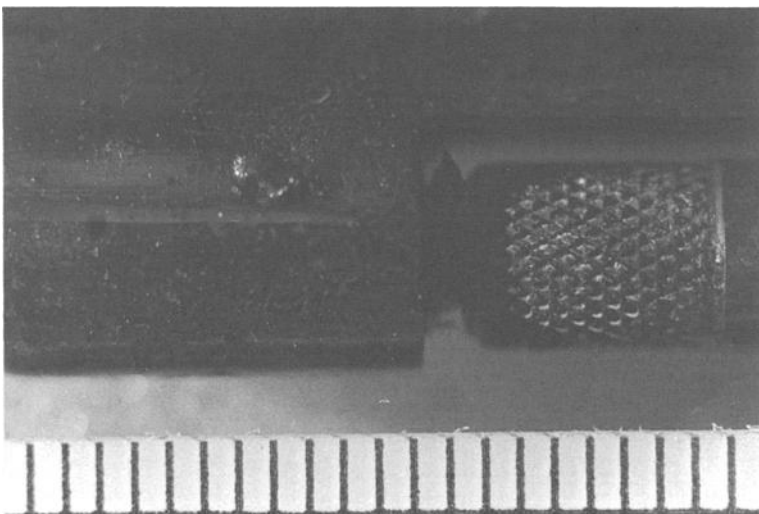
Close-up view of cylinder extractor rod with knurling. Note metal fragments impacted in knurling.
